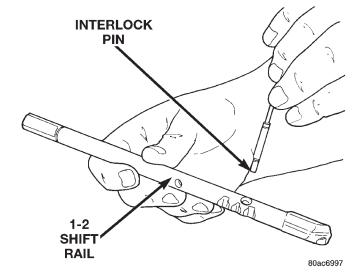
Install 1-2 Shift Rail Interlock Pin
